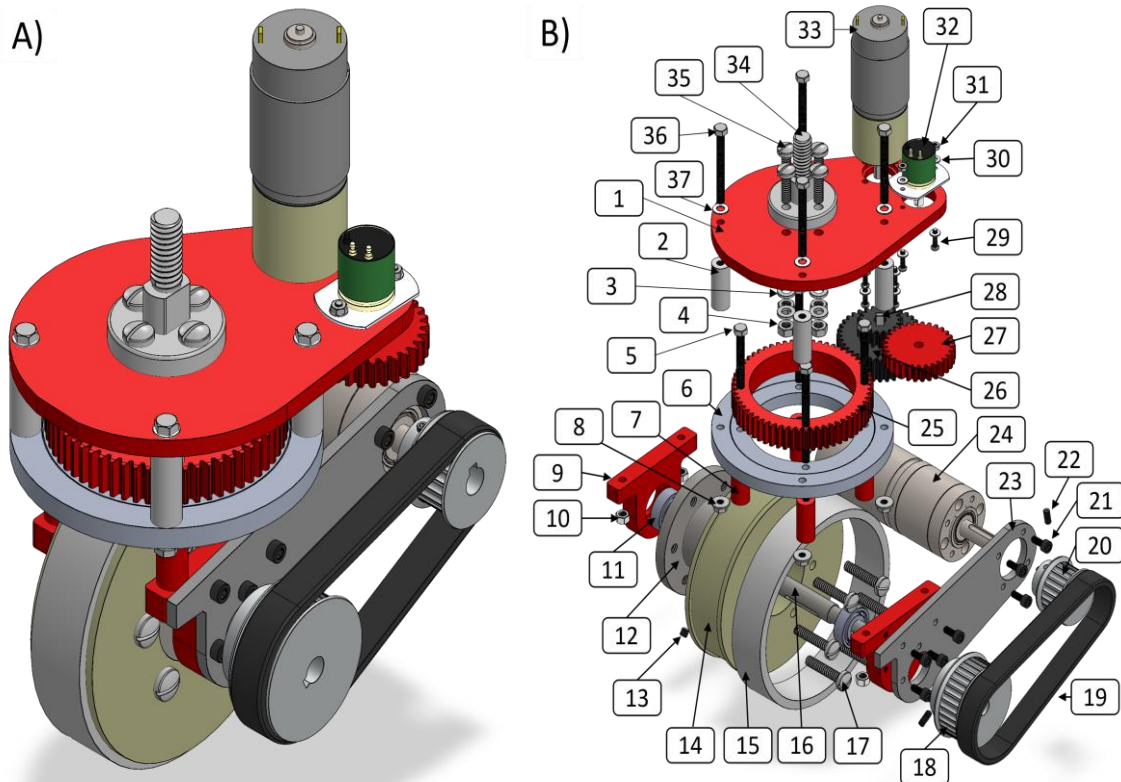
(a) Initial design of swerve drive module (b) exploded view of an initial design
